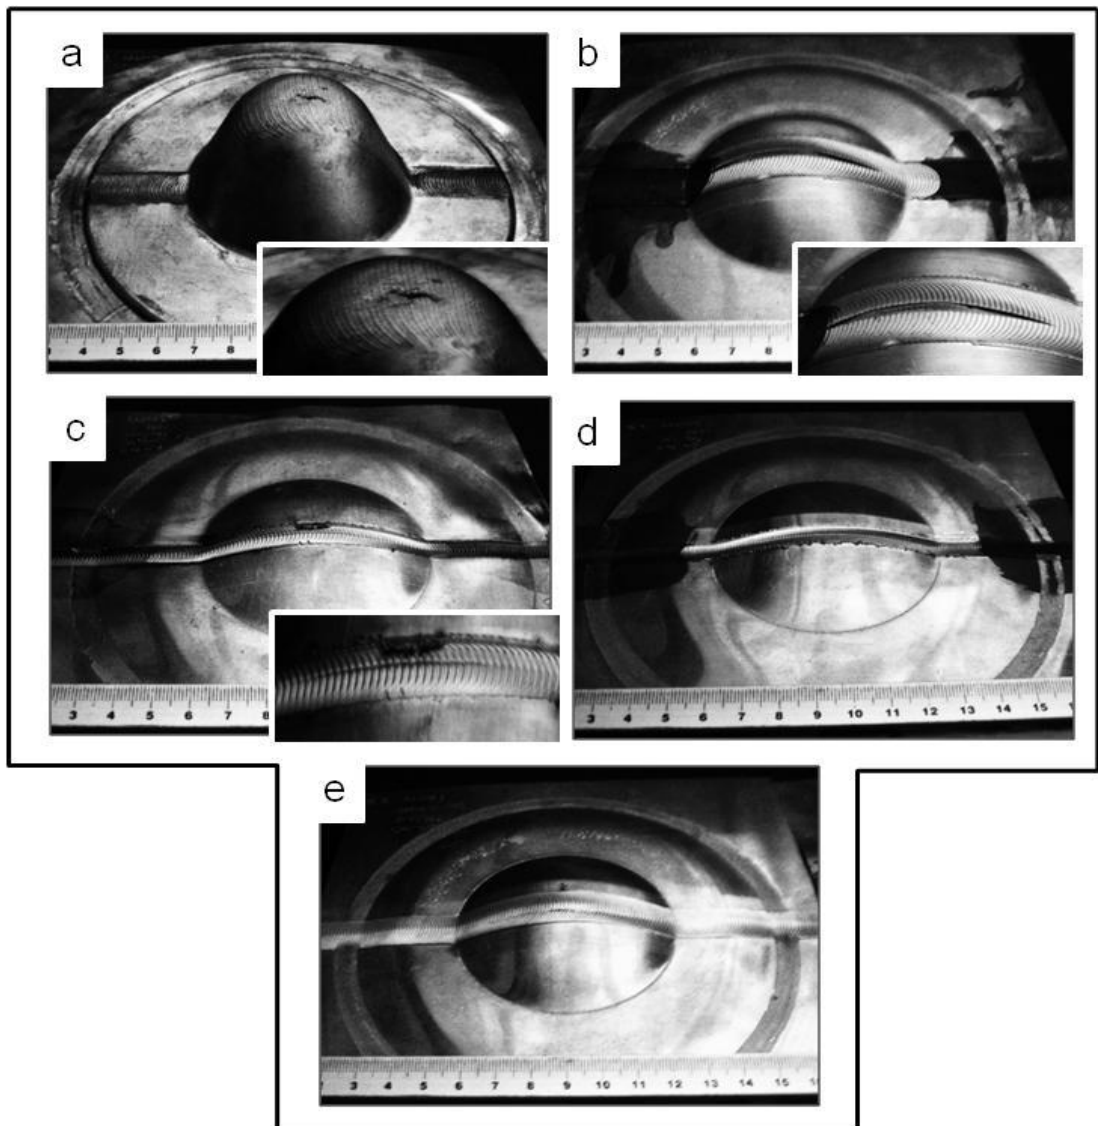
, Cone Tested Specimens of Welds Created using FW22.
